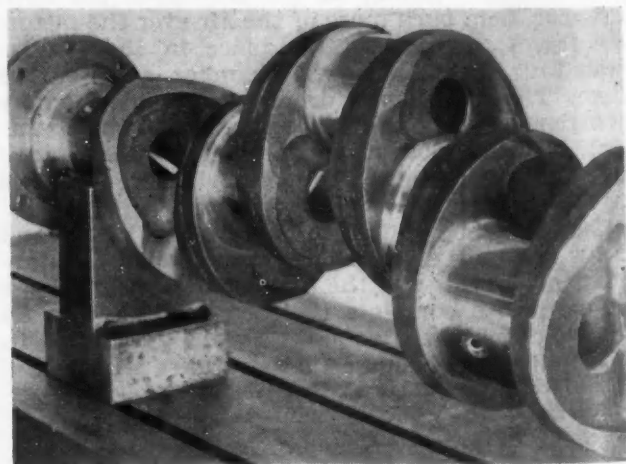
Larger Comet engines are built with cast graphitic-steel crankshafts which have physicals not unlike heat-treated forged shafts of SAE 1045 steel
